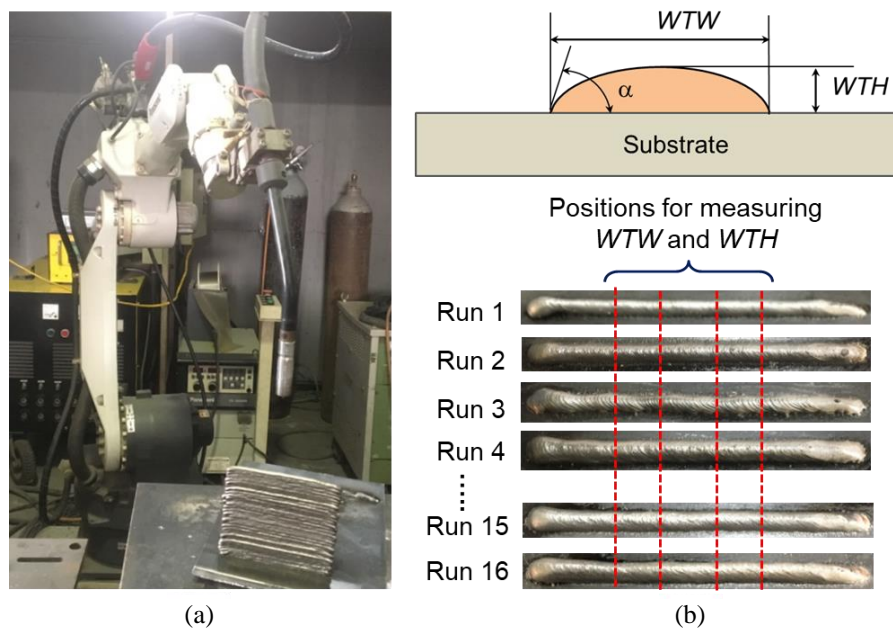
(a) GMAW-DED system and (b) single weld track and its geometry attributes
